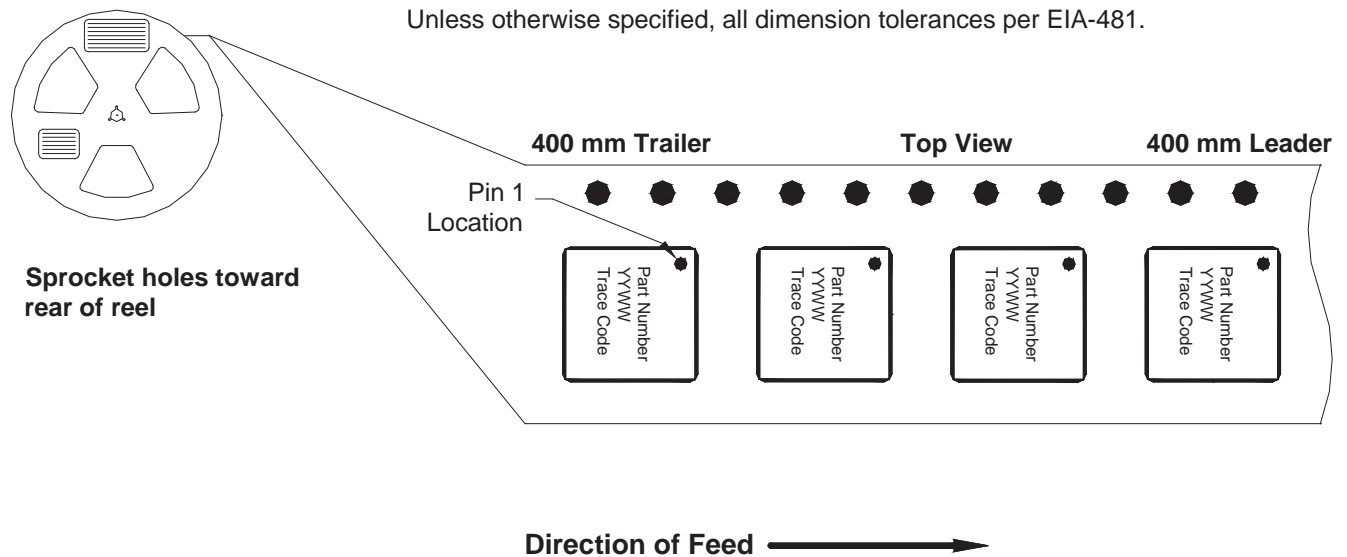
5.24mmx6.63mm (Carrier Tape Drawing with Part Orientation)
